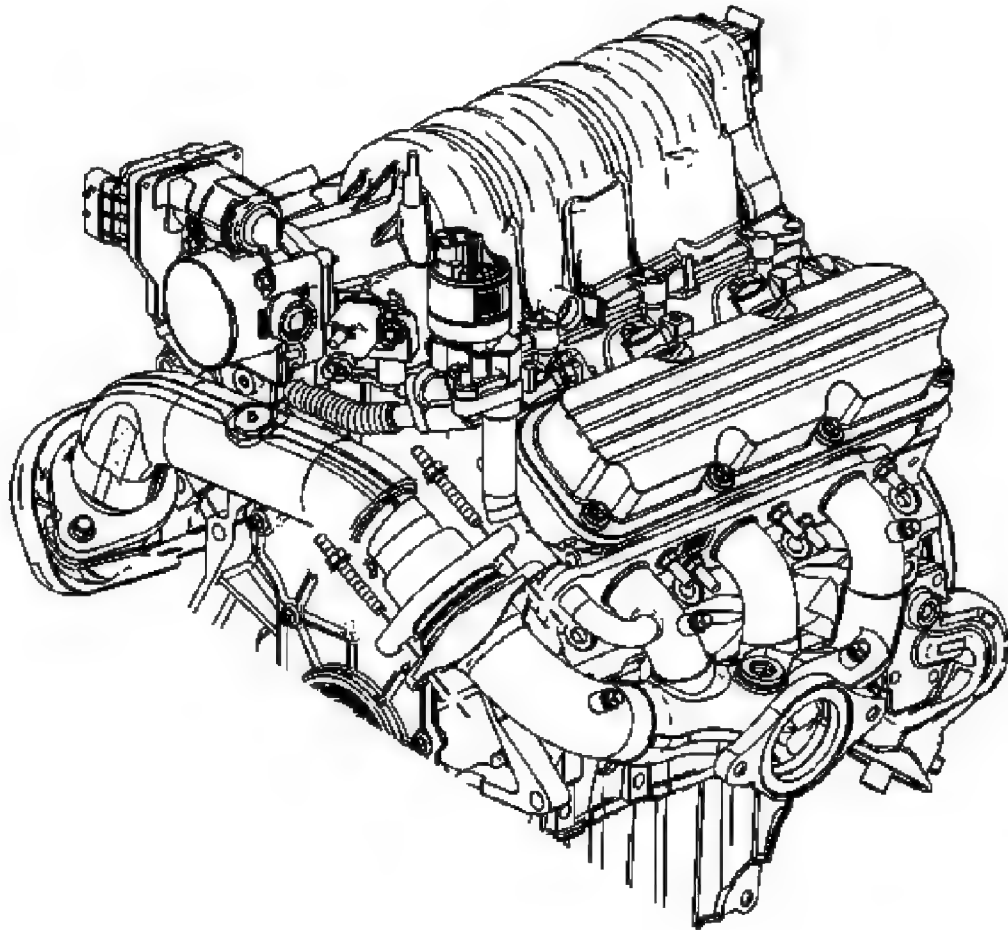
Removing/Installing Exhaust Crossover Pipe
